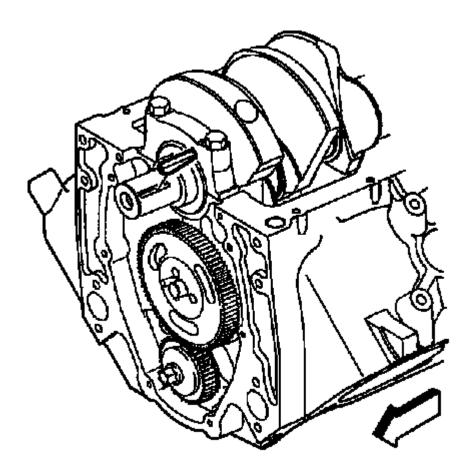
View Of Crankshaft Balancer Key Courtesy of GENERAL MOTORS CORP.
